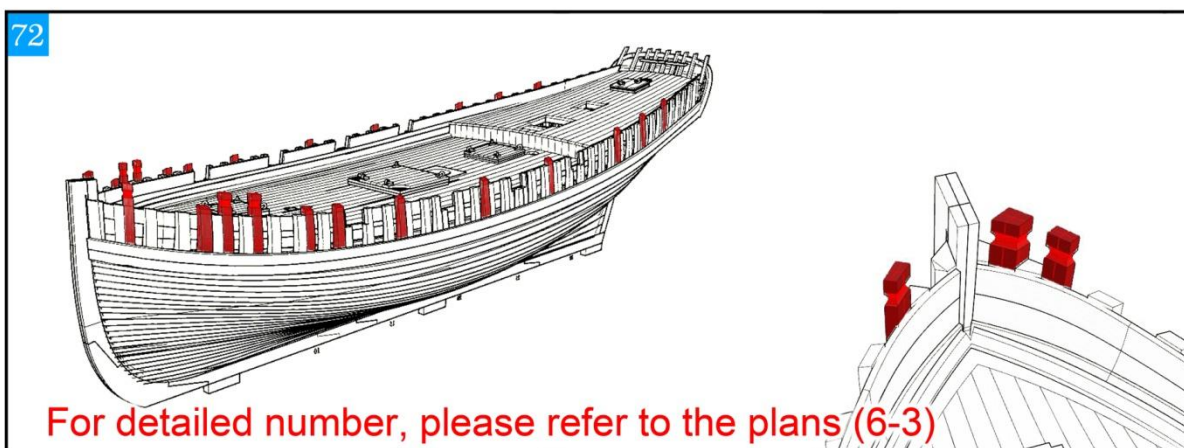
The top timbers are installed. Please refer to plan 6-3 for position and sizes.
